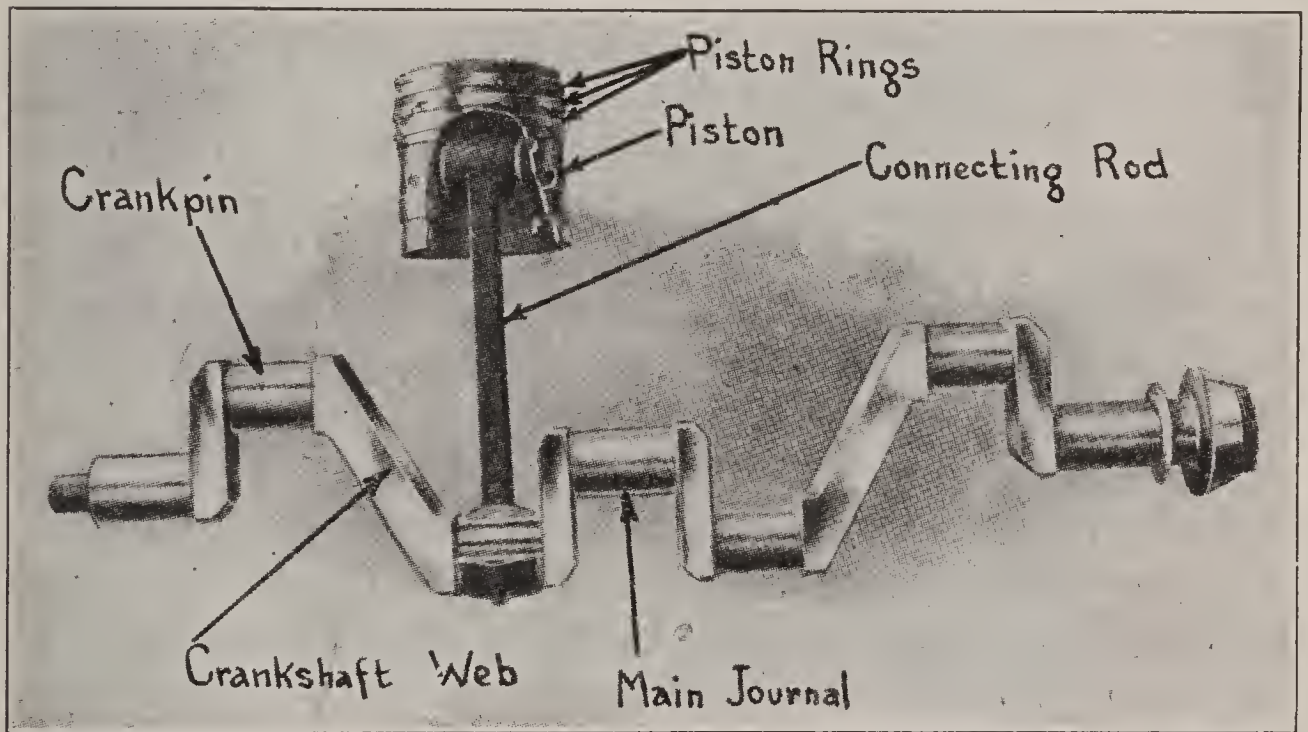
Four Cylinder Crankshaft of the Three Main Bearing Type.
